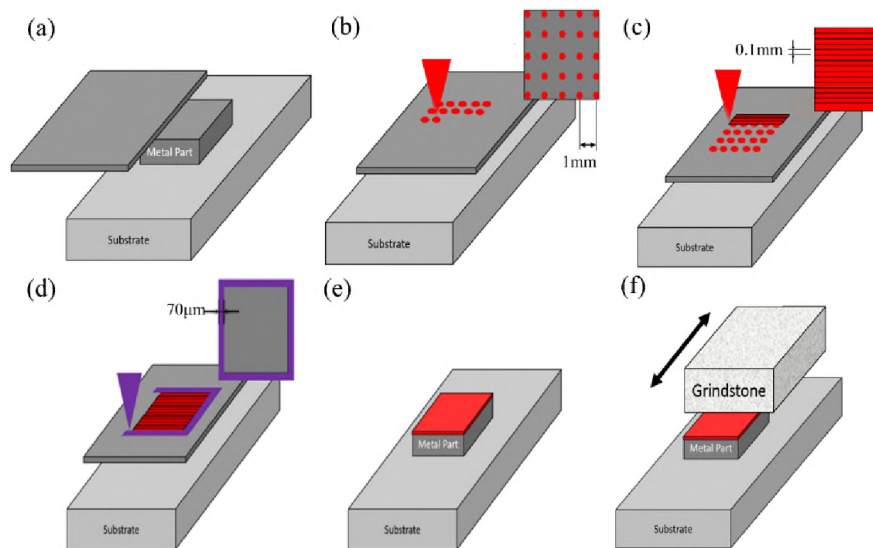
Key LFP process steps: (a) foil feeding, (b) spot welding, (c) pattern welding, (d) contour cutting, (e) excess foil removal, and (f) surface polishing.
